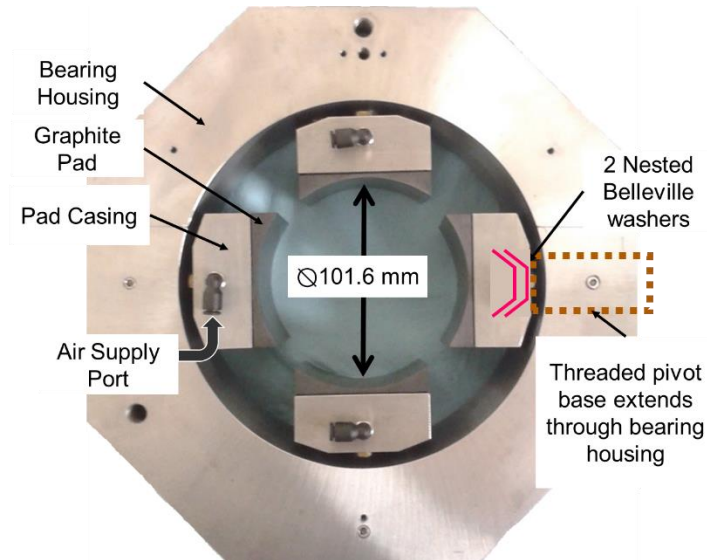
Photograph of bearing with porous carbon-graphite pads and schematic overlay view showing pivot-washer pad support
